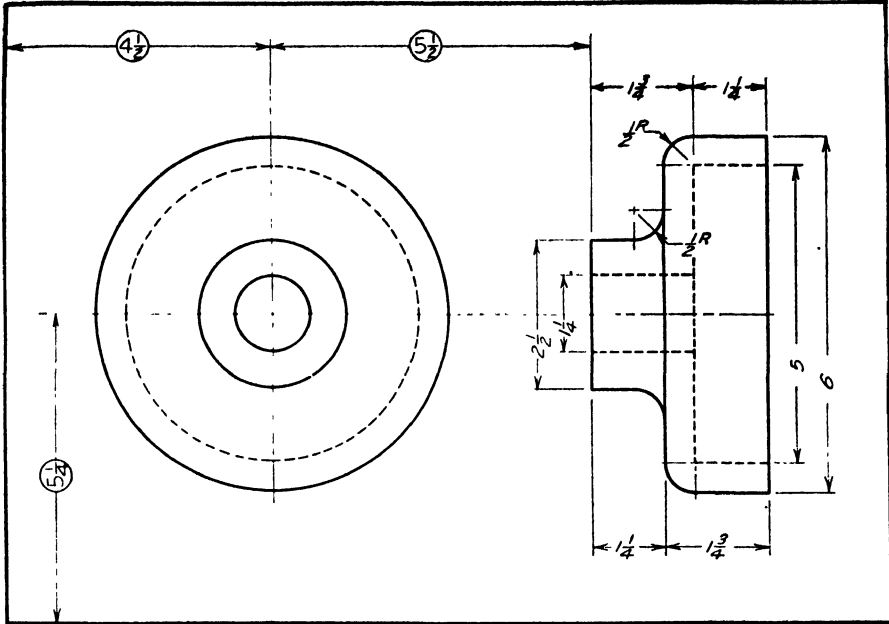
Prob. 141. Make a two-view drawing of the clamping disc, the right-hand view to be a full section.
